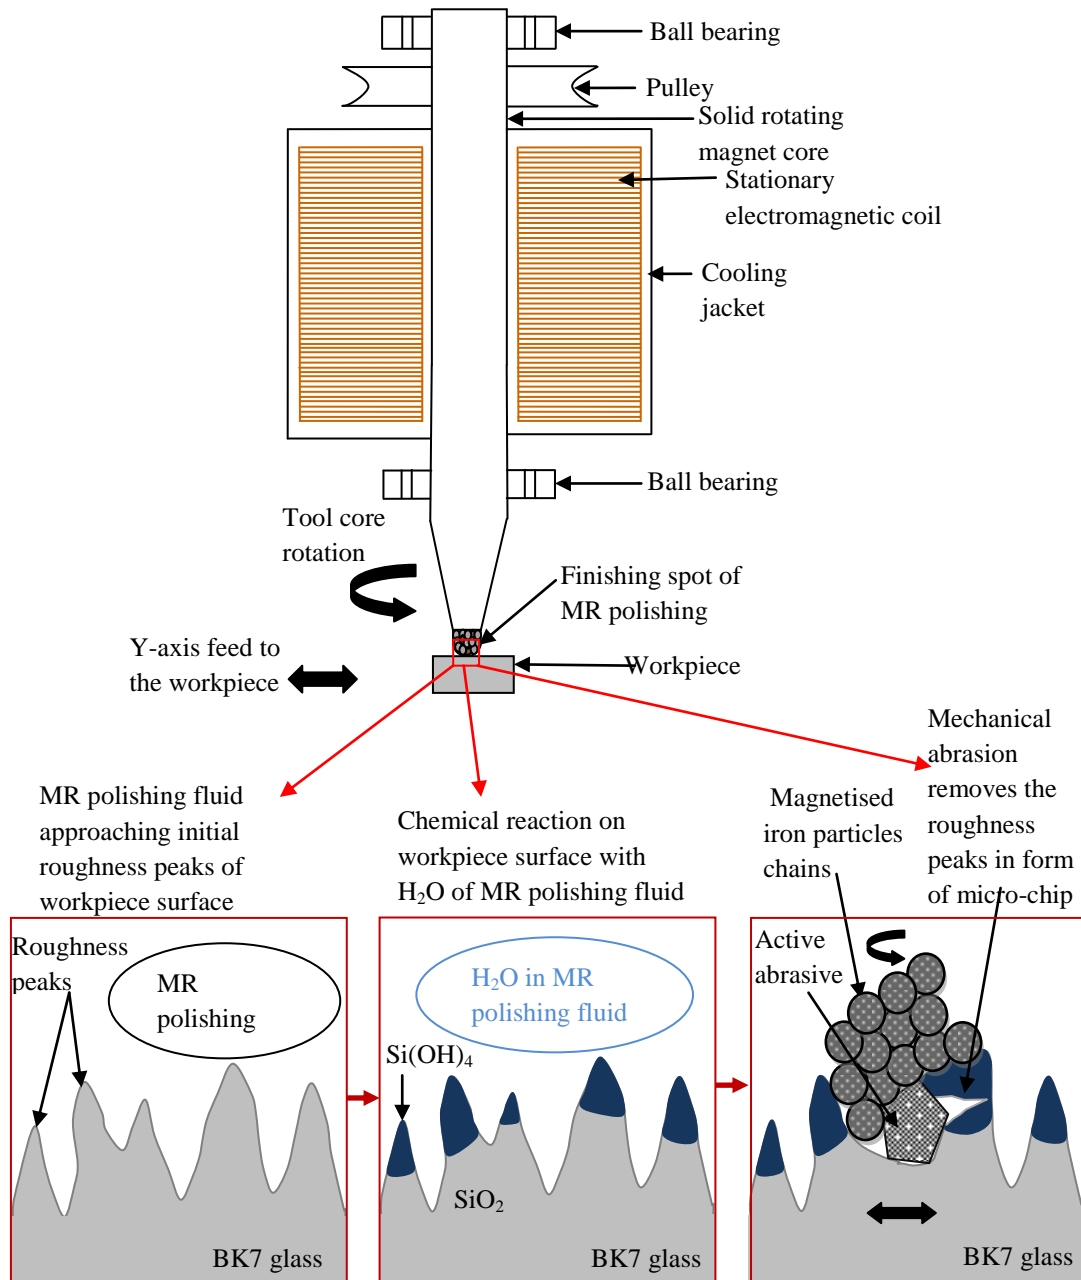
Schematic diagram of solid rotating core tool with chemical and mechanical abrasion mechanism of material removal on the surface of BK7 glass workpiece
